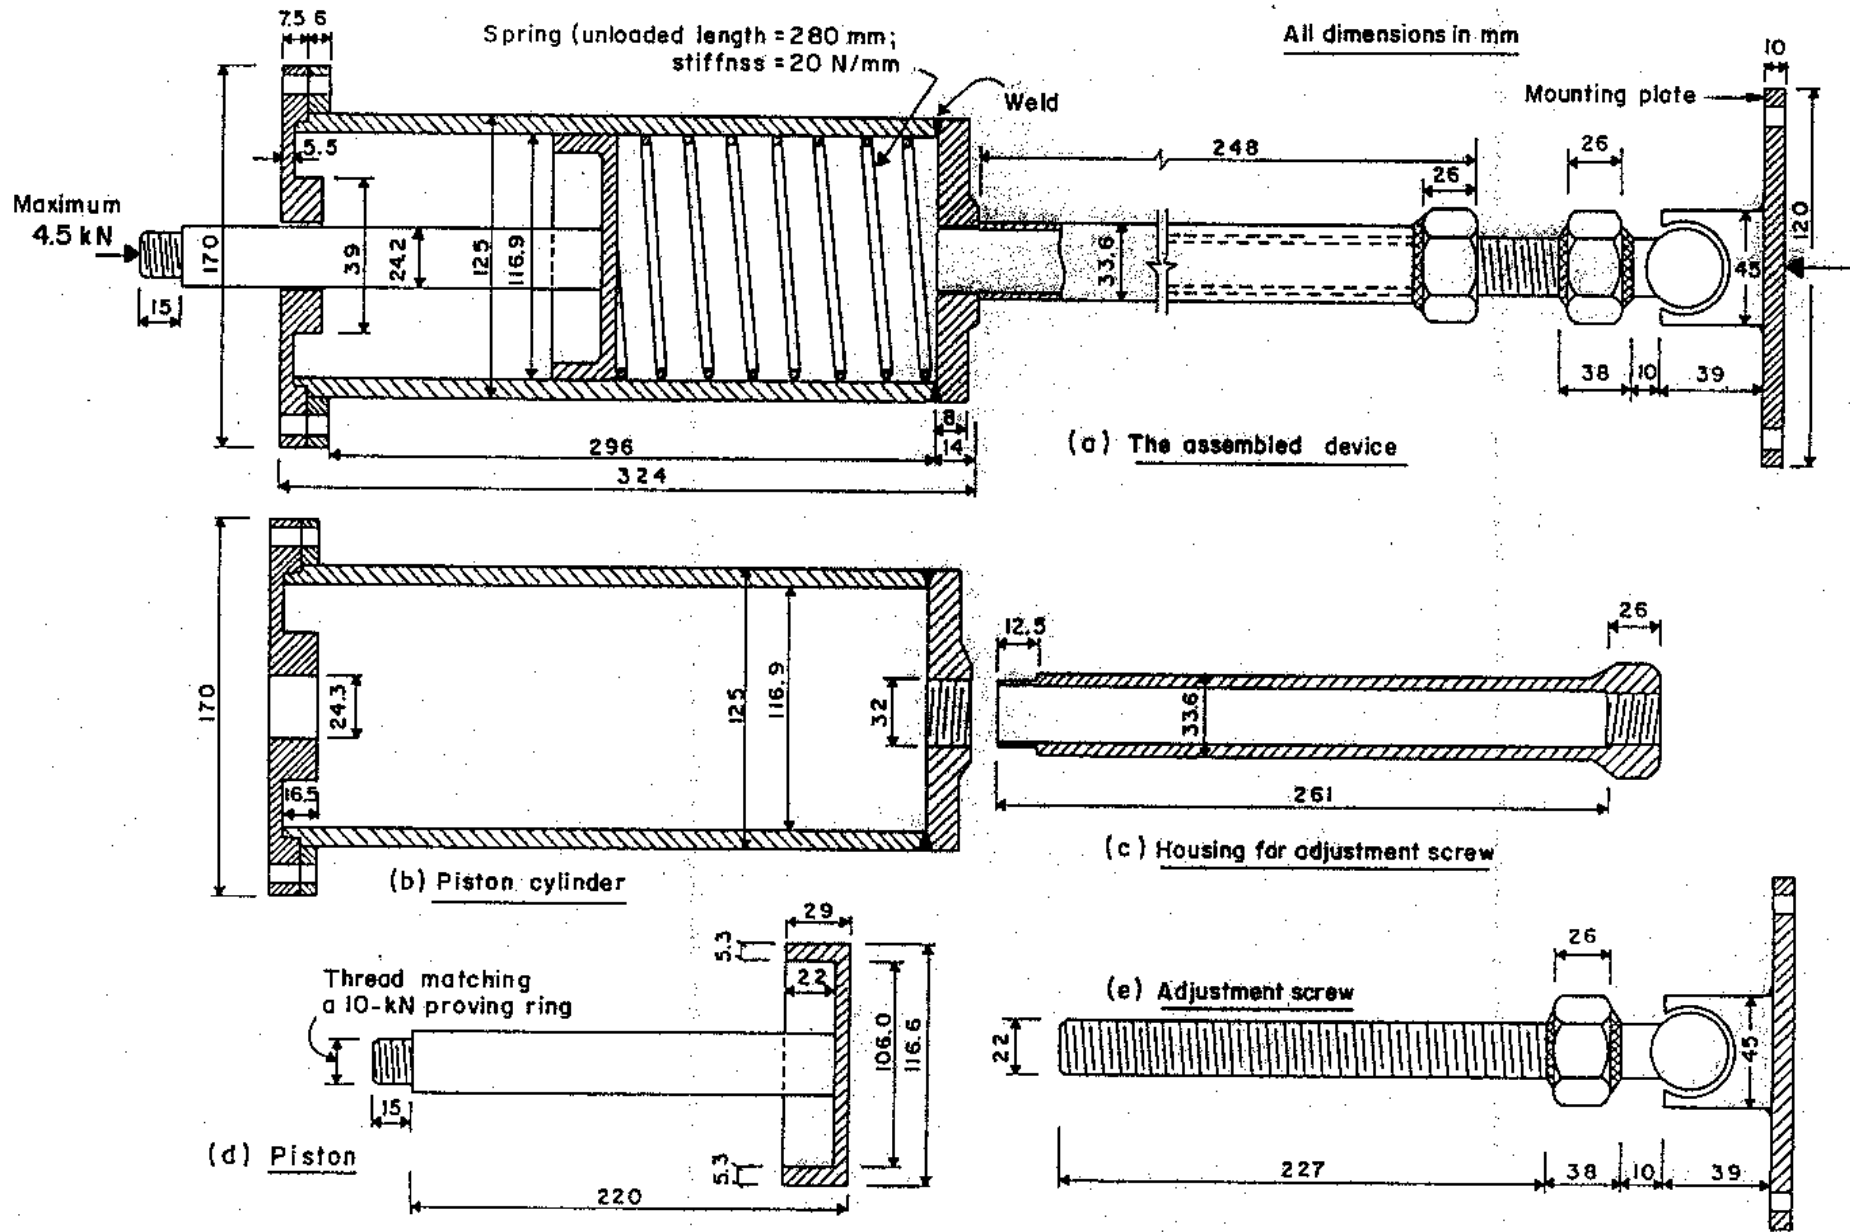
Details of the spring loaded piston used for lateral load application in iswests or priswests (after Aybak, 1988)
